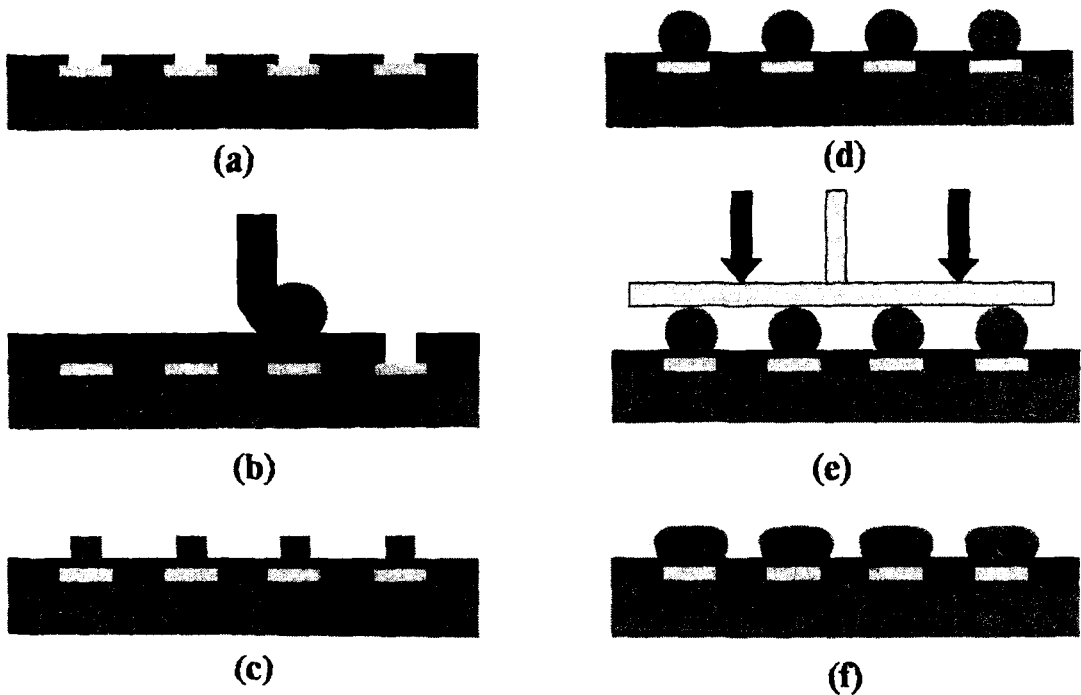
Coined solder bumping on PCBs. (a) Micro-via PCB, (b) Solder paste screen printing, (c) Solder paste deposition on metal pads, (d) Solder reflow, (e) Coining, and (f) Coined solder bumps
